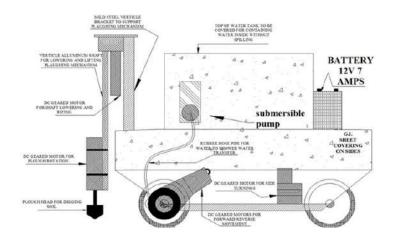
Auto Cad Drawing of Agribot (Side View)
